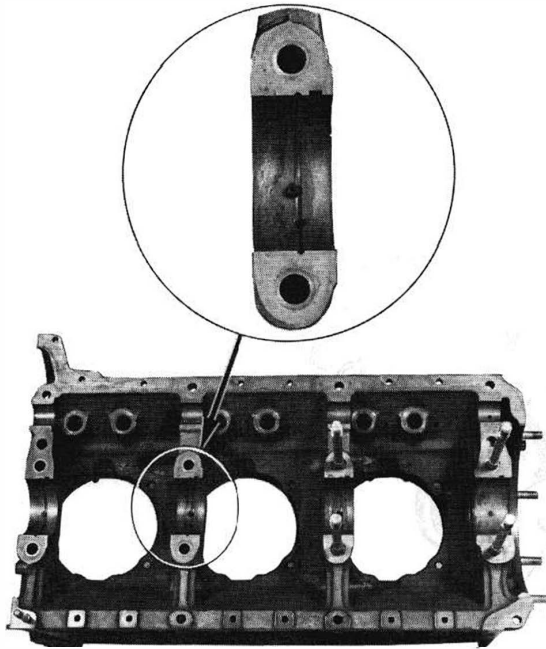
Crankcase Interior Showing Moderate Fretting at Stud Locations on Saddle Supports
